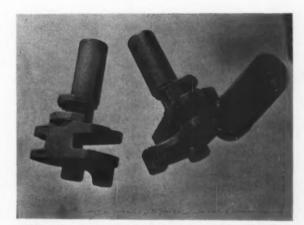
Casting at the left was poured at 3000 F; casting at the right was poured at 2900 F. The drag side of the casting at the left is shown, but the cope is equally smooth. Note rough surface of casting poured at the lower temperature.
